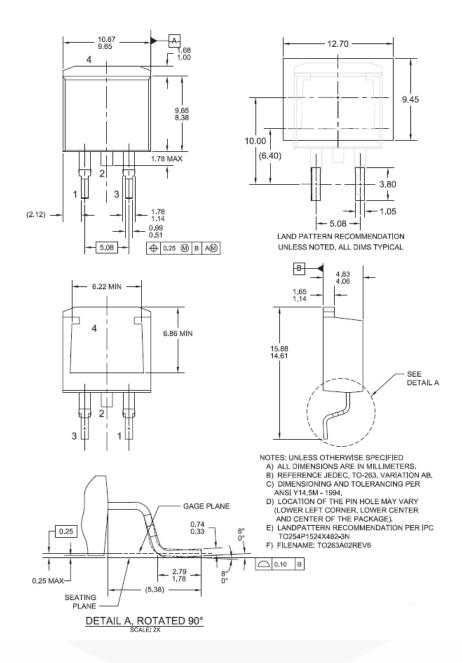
TO263 (D²PAK), Molded, 2-Lead, Surface Mount
